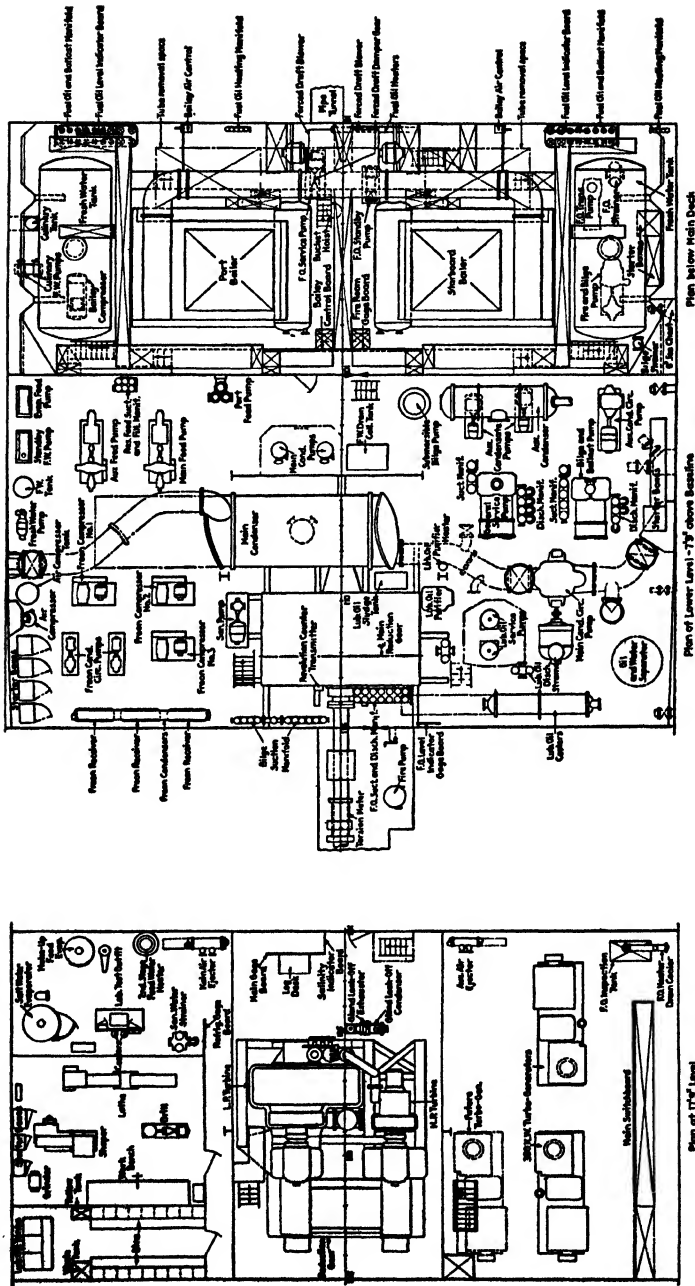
Plan of machinery arrangement of S.S. Delbruzl. 7,800 shp geared-turbine installation. (*Marine Engineering and Shipping Review.*)
